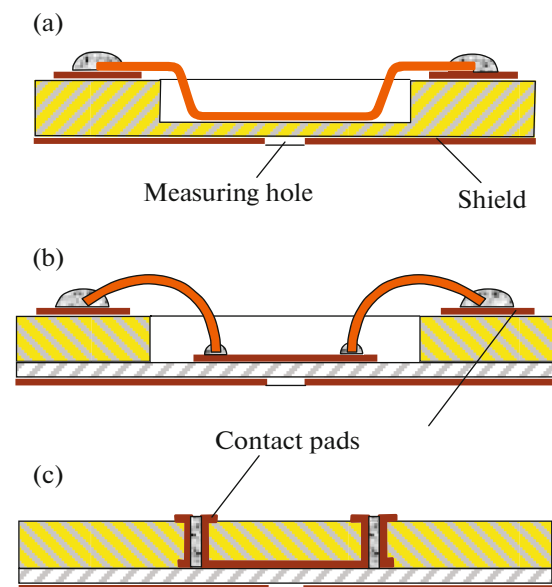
The design of the inductive element of the oscillatory circuit: (a) on a single-layer circuit board and (b, c) on two-layer circuit boards.
